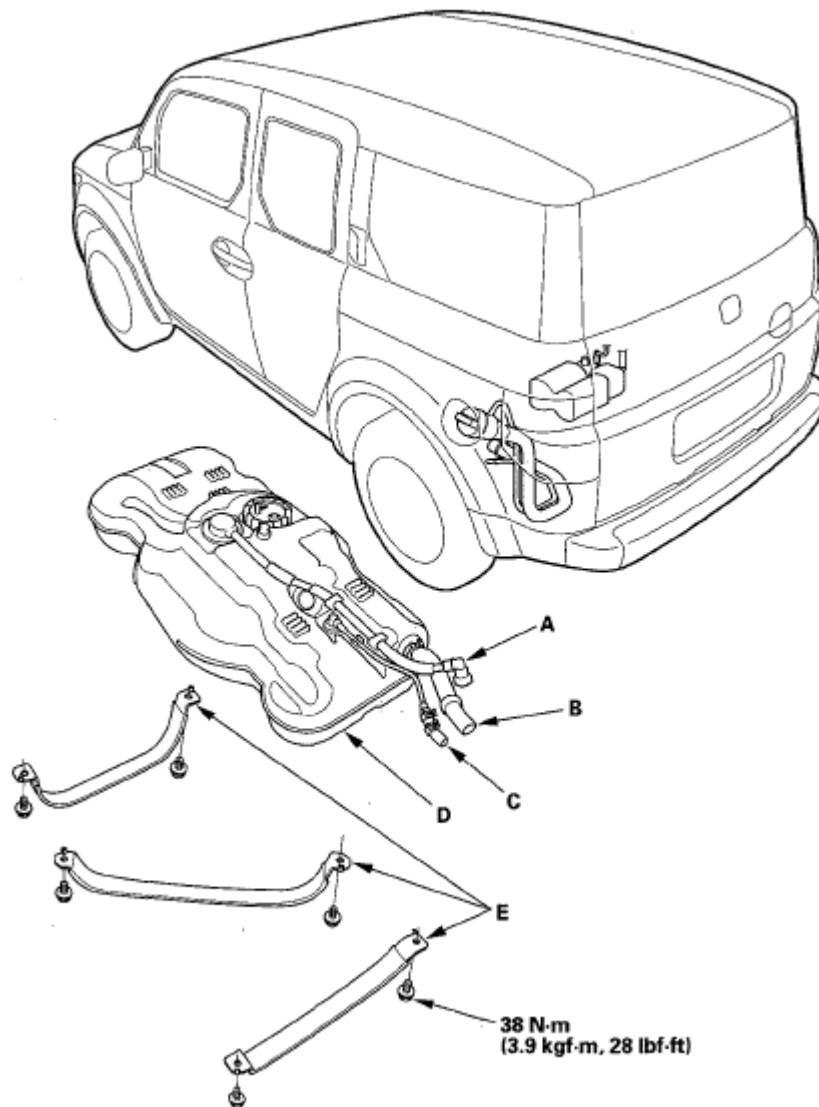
Identifying Fuel Tank Parts With Torque Specification
